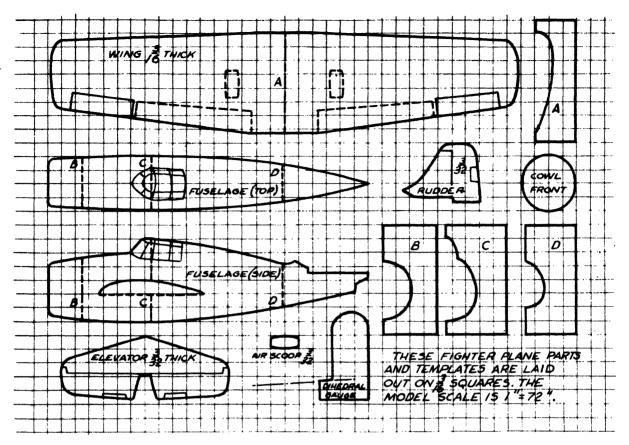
TEMPLATE DRAWINGS FOR A MODEL PLANE
